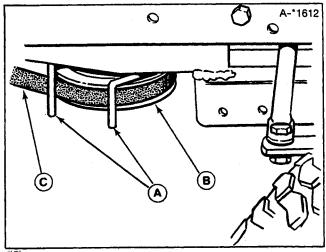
Right-Hand PTO Pulley Belt Stop A. Belt Stop
